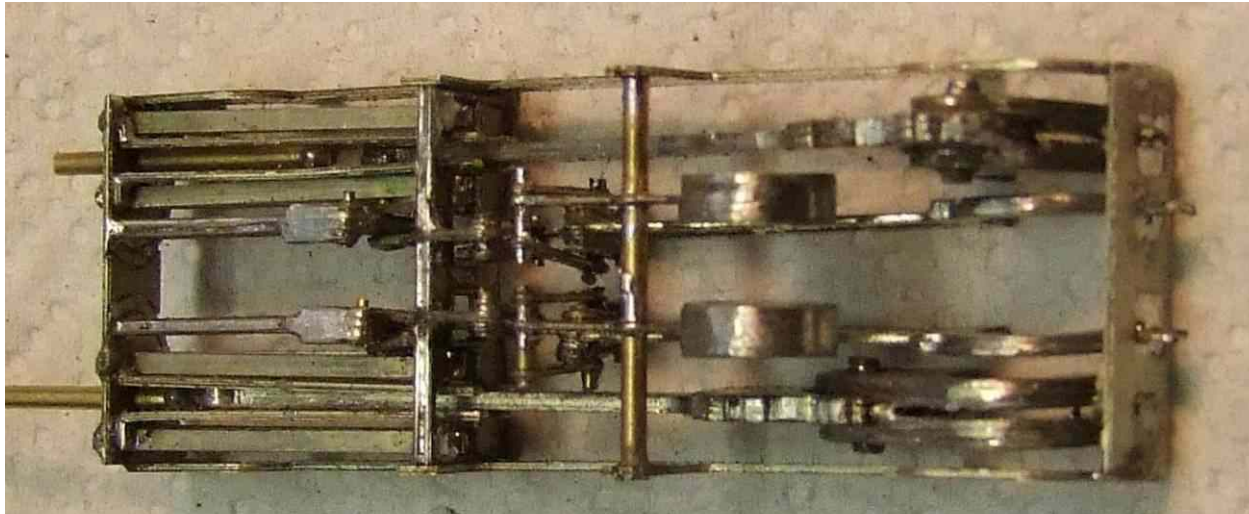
Walschaerts' Valve Gear for Piston Valve Cylinders
